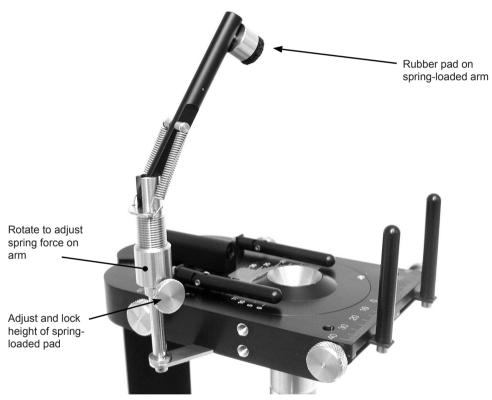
Clamping arrangement using the Spring-loaded Clamp GU0138
